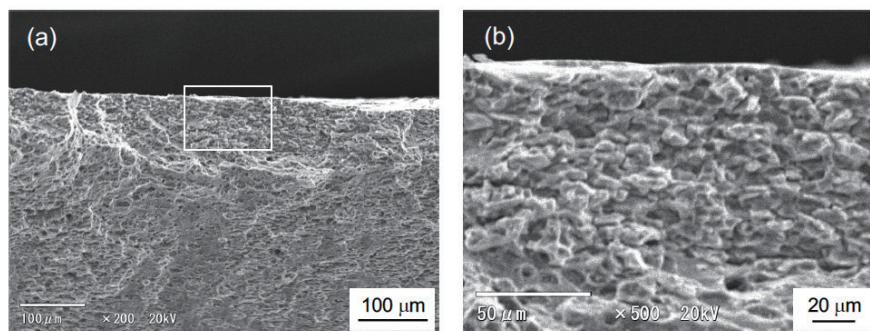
Fracture surfaces of the 7075-T6 alloy (Wet) corresponding to Fig.1(a), magnified (b).
